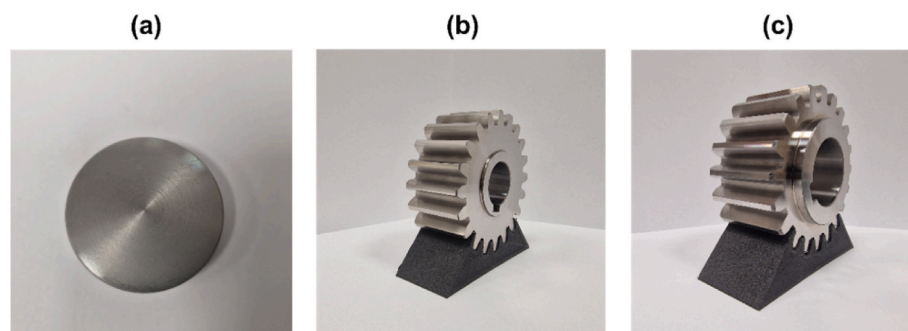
Specimen geometries: (a) cylindrical sample, (b) 3 mm modulus gear, (c) 4 mm modulus gear.
